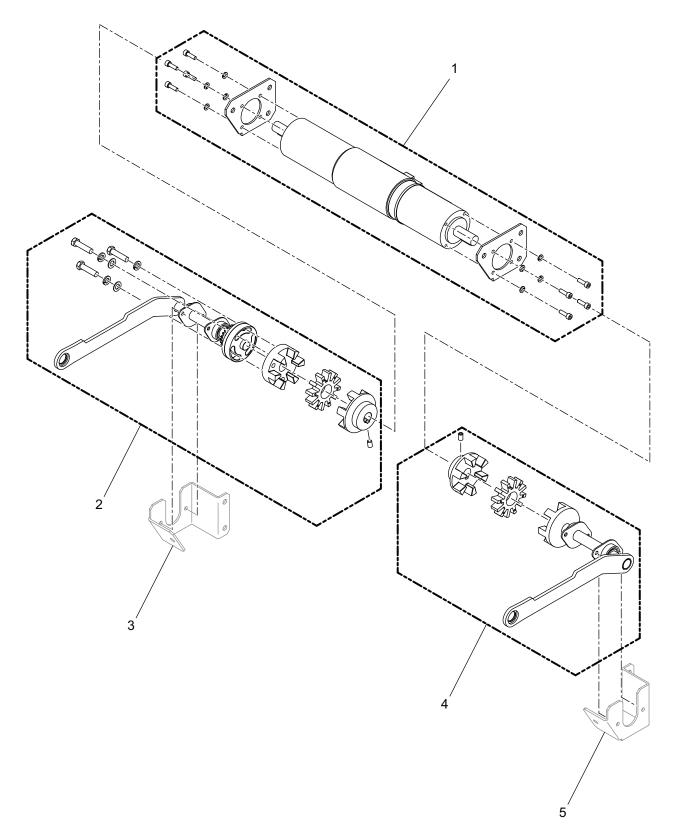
FR2E-SERIES MOTOR DRIVE ASSEMBLY
